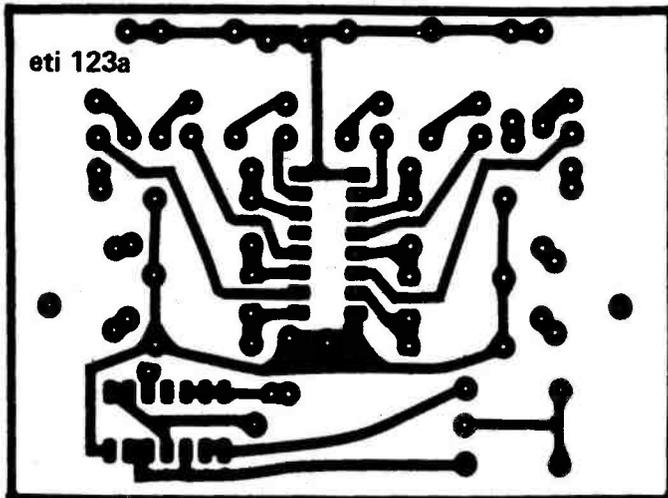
Printed-circuit board layout – ETI 123a. Full size 88 x 63 mm. Fig. 7. Printed-circuit board layout – ETI 123b. Full size 88 x 71 mm.
